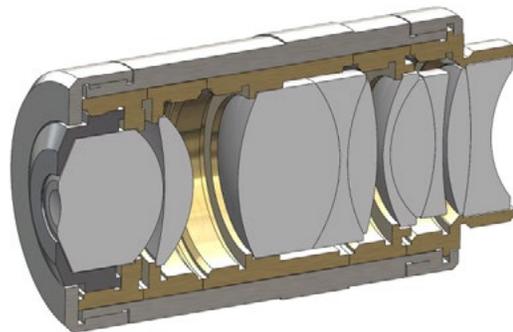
Example of stacked-cell assembly using the mounted element centering method. The opto-mechanical configuration and subcells’ design were specifically adapted to use CNC-controlled turning for the machining and alignment of the cell-mounted lenses.
